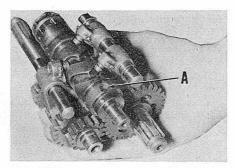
Transmission and shifter assembly ready for installation. Note position of shift stopper ball detent (A).
